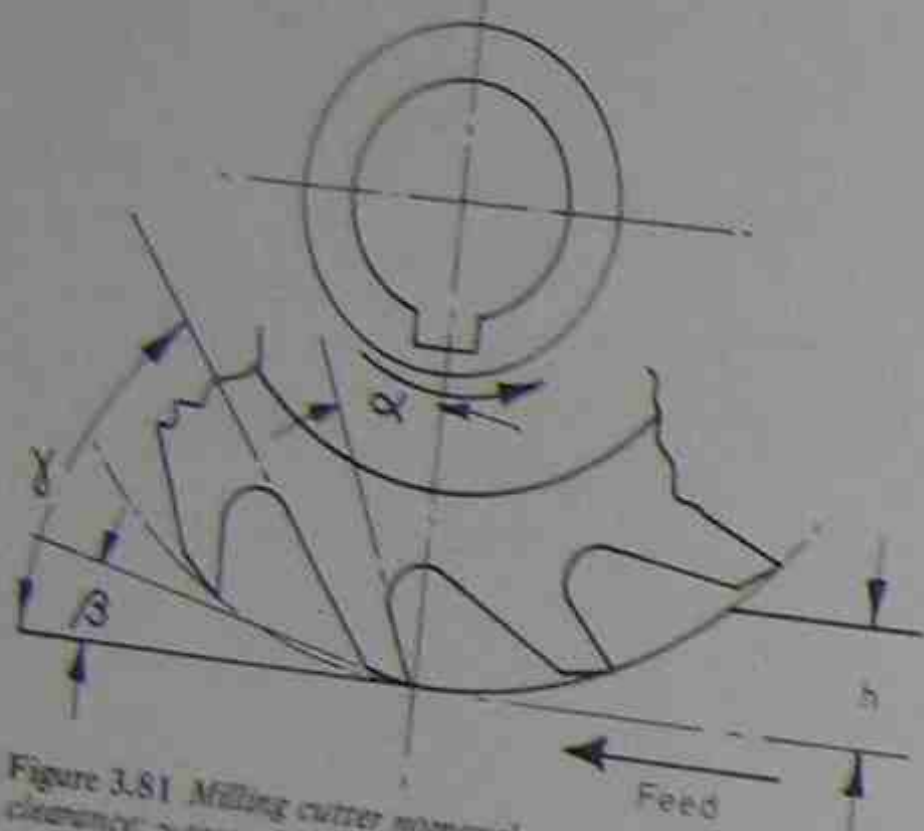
Milling cutter nomenclature: α -rake; β -primary clearance; γ -secondary clearance; h -depth of cut
